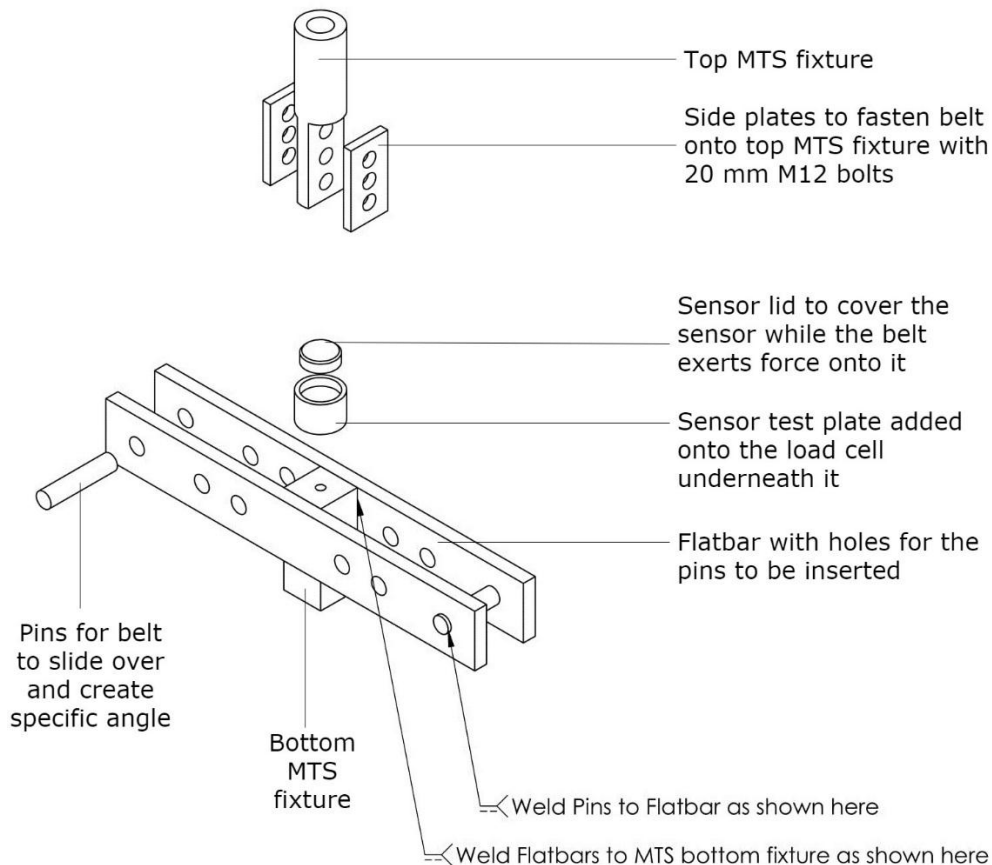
The CAD test-rig design showing how all the manufactured components fit together.
